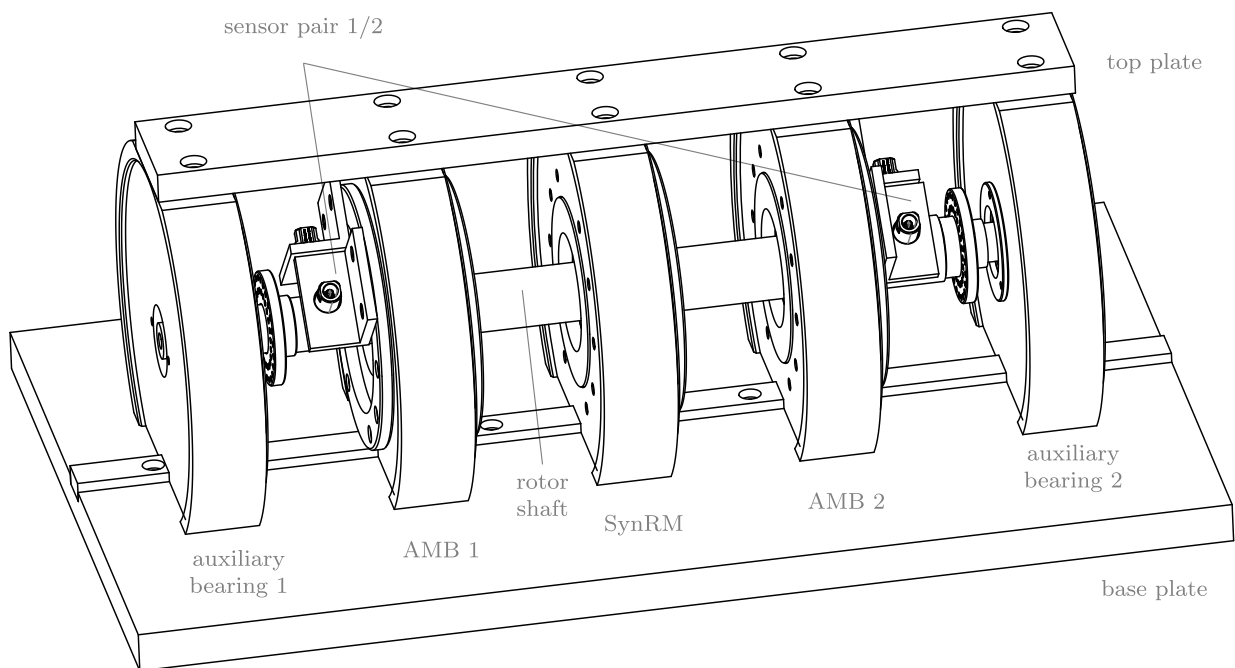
computer-aided design (CAD) sketch of the complete test stand assembly, designed during the course of this thesis. The mechanical design is carried out in SolidWorks®.
